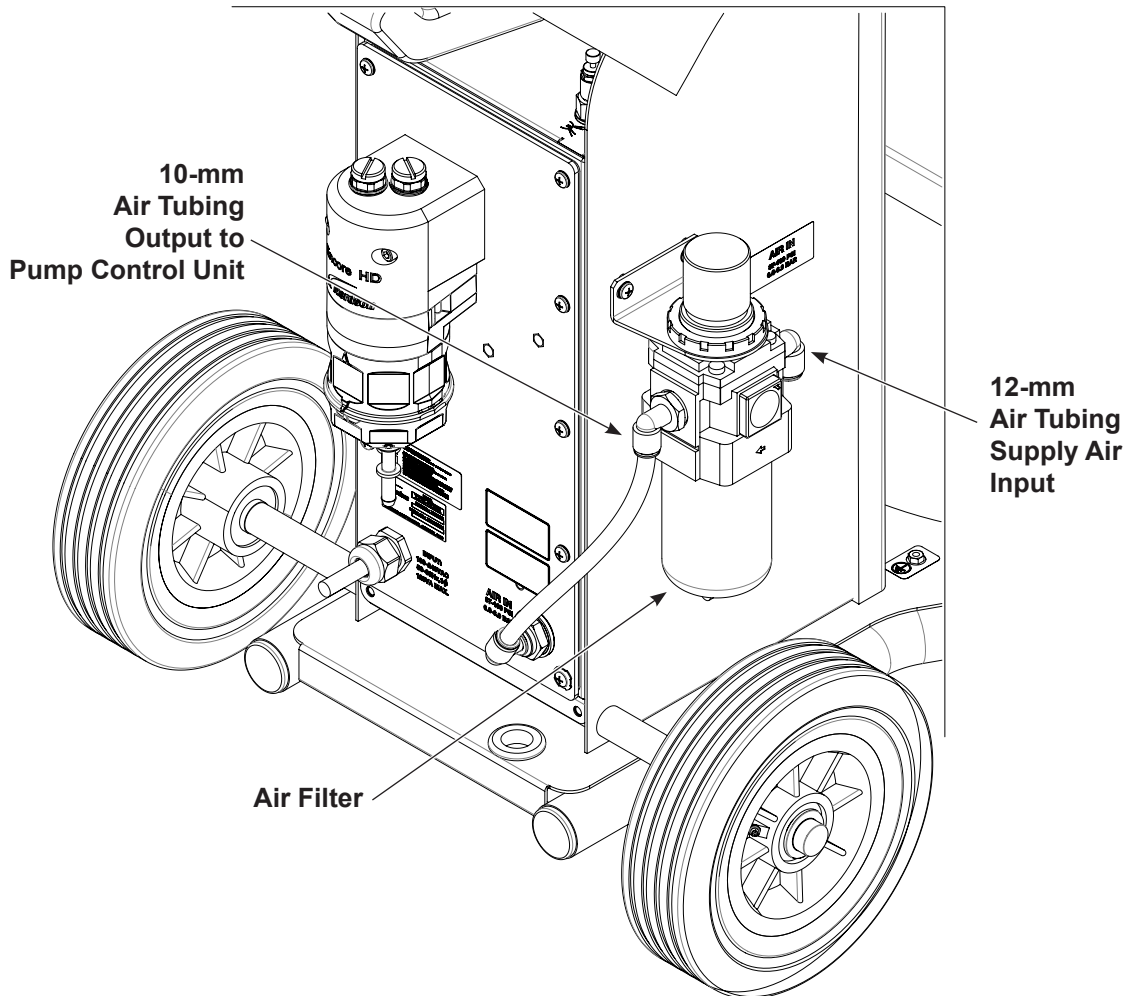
System Air Supply Connection (Shown with Mobile System)
